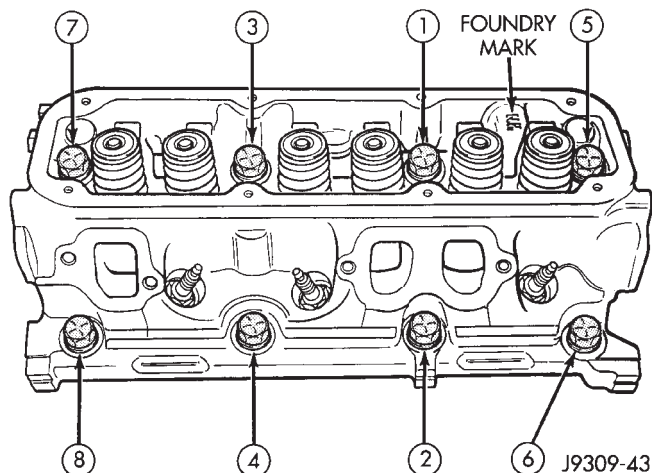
Cylinder Head Bolt -Tightening Sequence
